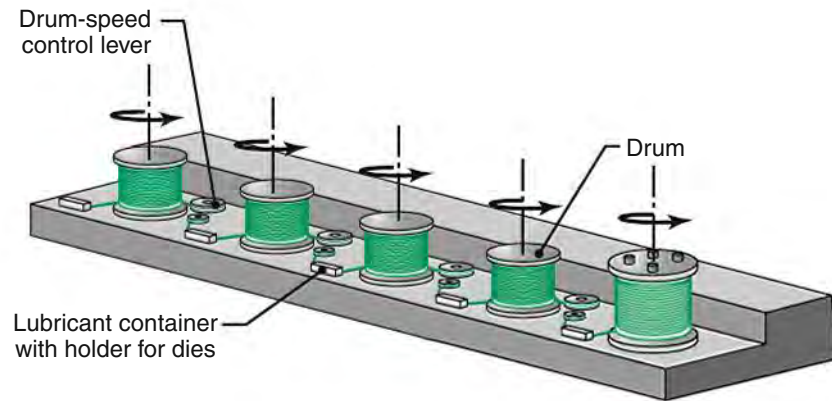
An illustration of multistage wire drawing typically used to produce copper wire for electrical wiring. *Source:* After H. Auerswald.
